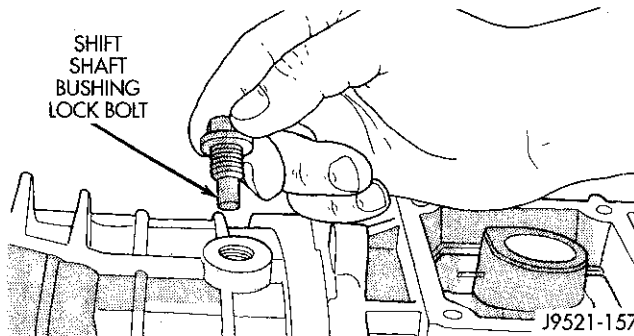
Installing Shift Shaft Bushing Lock Bolt
